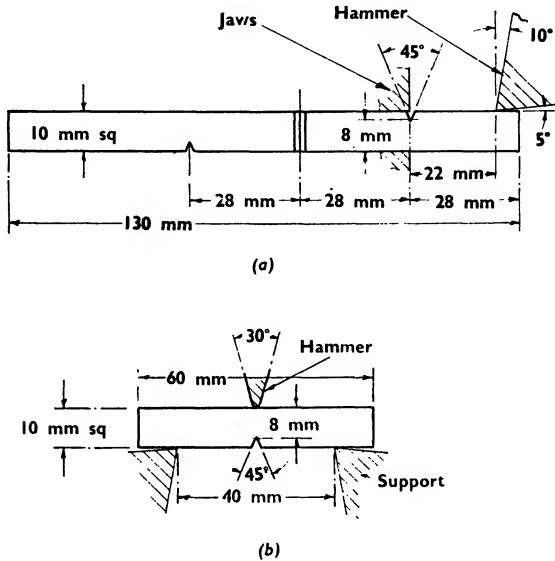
PREPARED SPECIMENS FOR TEST IN IZOD AND CHARPY TESTING MACHINES
